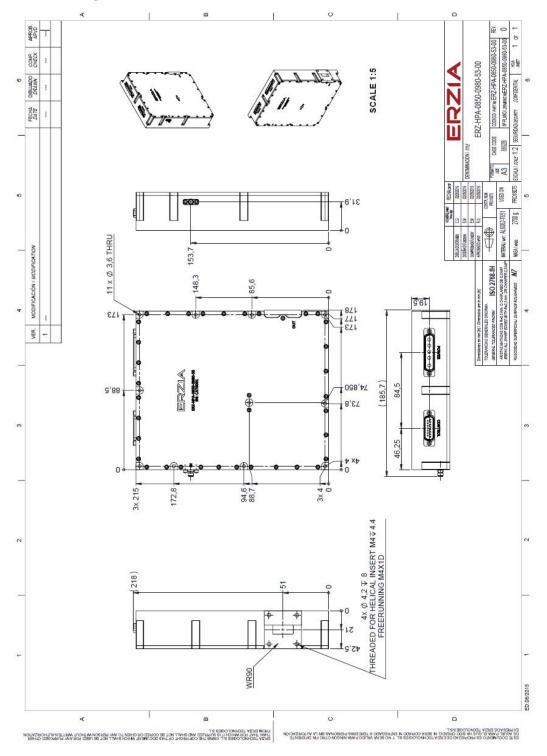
ERZ-HPA-0850-0980-55 Outline Drawing
